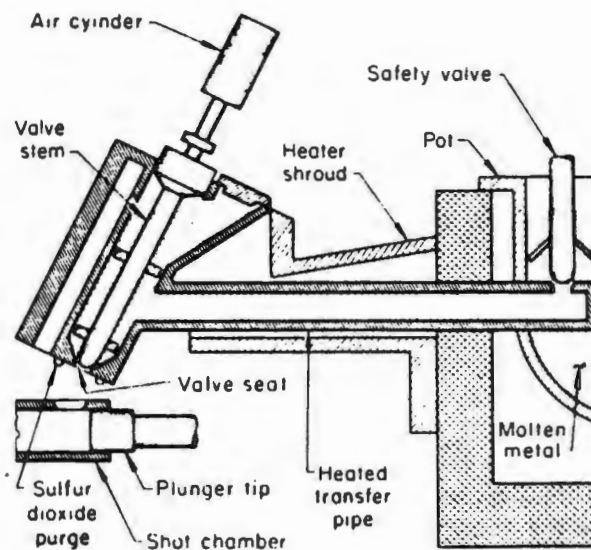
Gravity-Feed System for Supplying Molten Magnesium Alloy to the Shot Chamber of a Cold-Chamber Die Casting Machine (Reprinted from [12])
